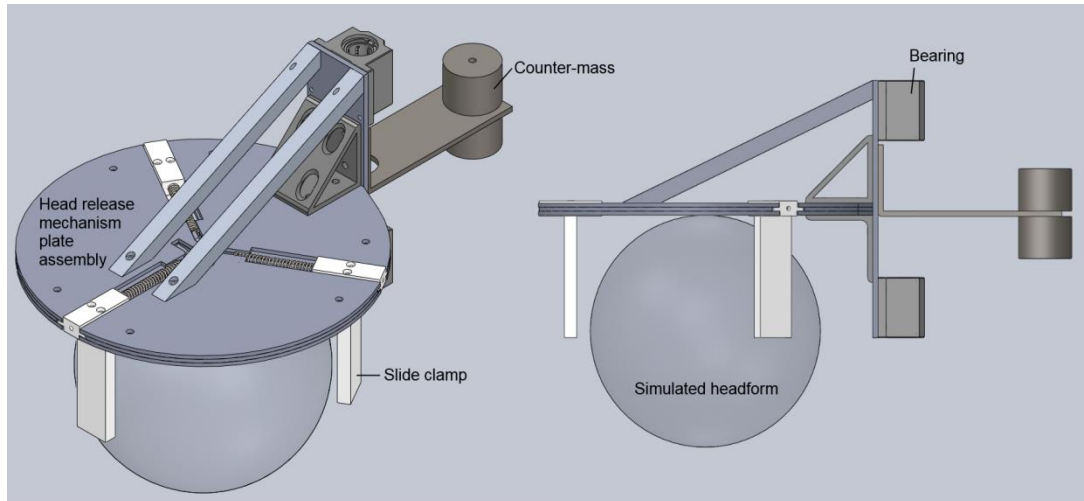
3D rendering for the final design of the bearing mount (including the head control mechanism) and counter-mass
